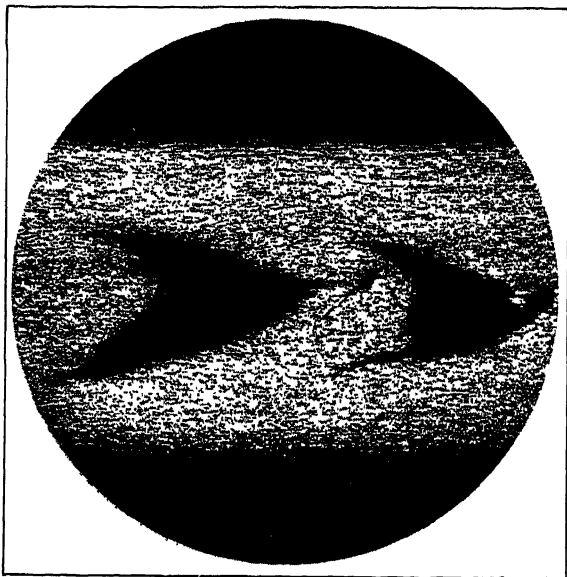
BROKEN CENTER OF WIRE SHOWN IN FIG. 16.
